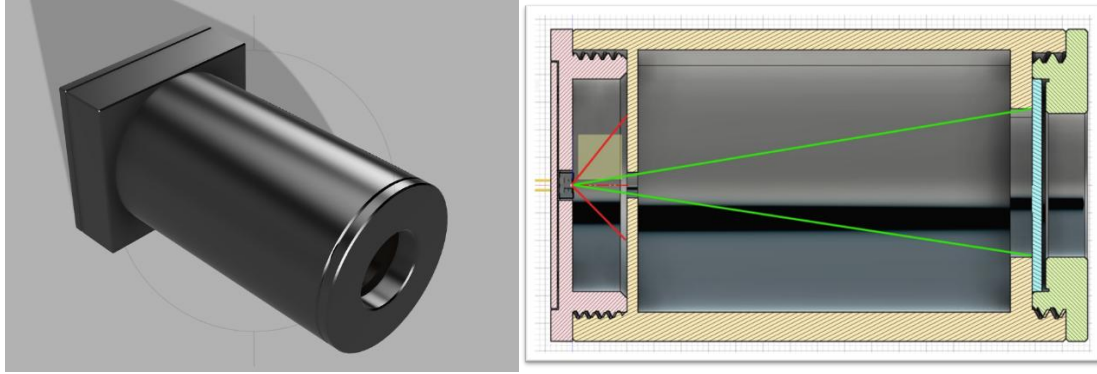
Lens Tube Design and Cross-Sectional View
